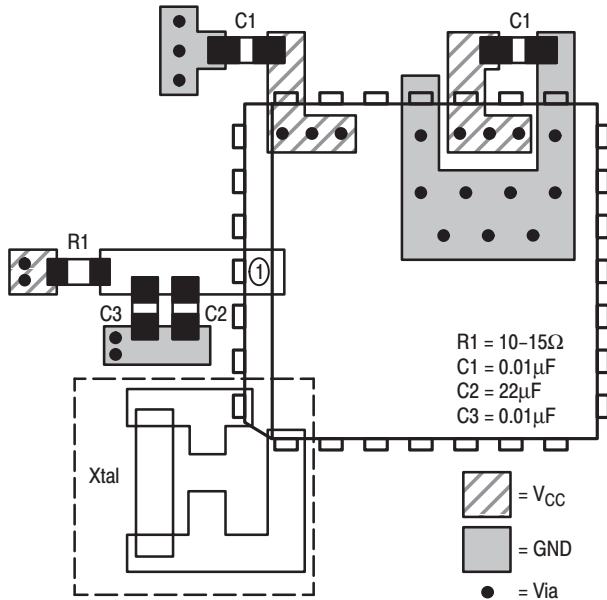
PCB Board Layout for MC12429 (28 PLCC)
